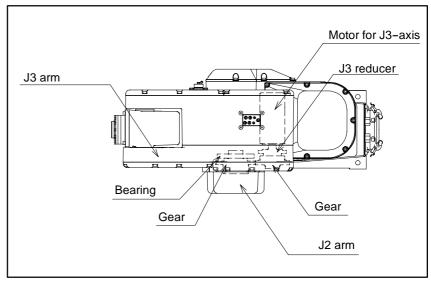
J3-axis drive mechanism (LR Mate 100i)
